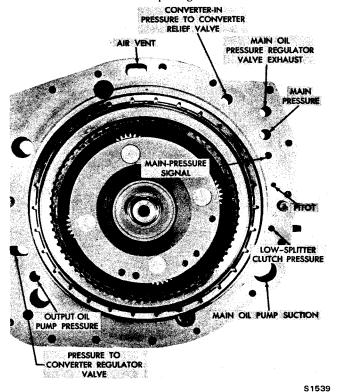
Rear of retarder housing (CBT, CLBT, VCLBT)—oil passages
